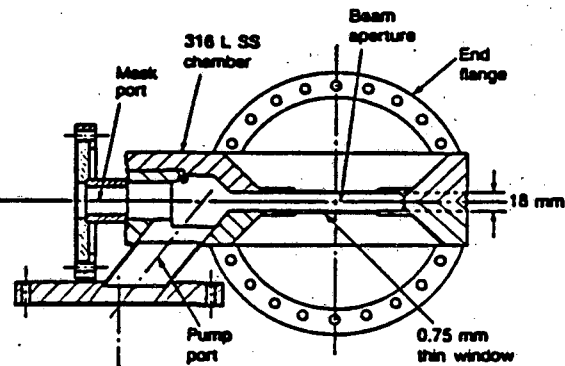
SSRL BL X Wiggler Vacuum Chamber Section
